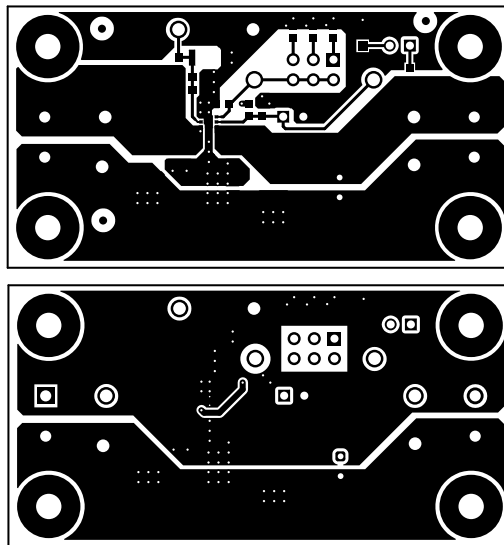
TPS25961EVM Board (a) Top Layer (b) Bottom Layer
